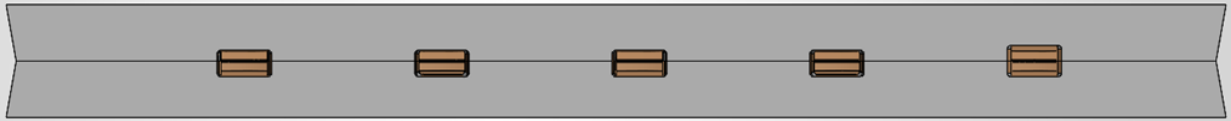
Draft Angle Diagram - Because the mold was 3D-printed, no draft was required on the casting itself. However, a -10° draft was added to the outer mold to securely hold the printed mold inside the flask during packing and pouring.
